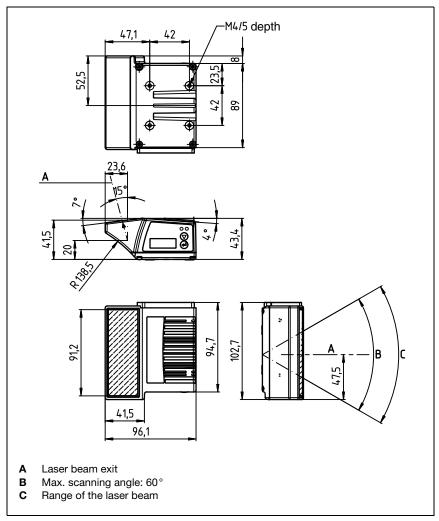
Dimensioned drawing of BCL 338 i S...100 with deflecting mirror
